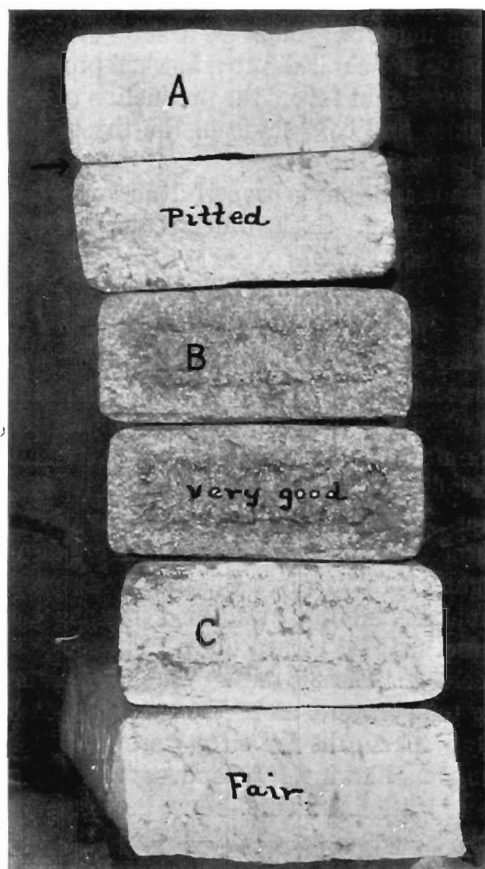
FRACTURES OF SOFT PLATE STEEL INGOTS MADE BY THE AUTHOR AT THE LINDEN STEEL WORKS IN 1888.
